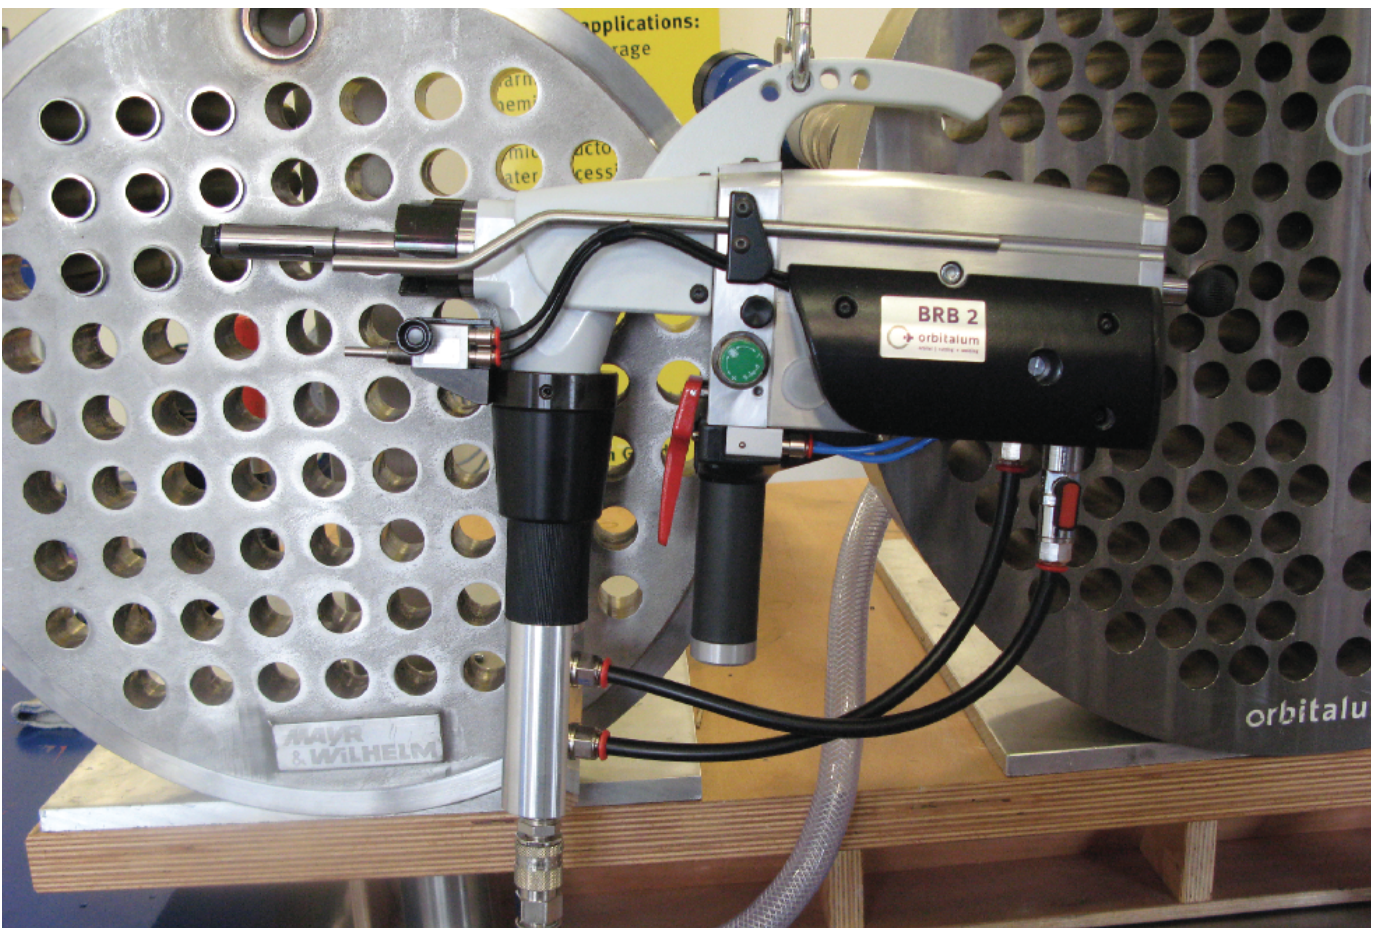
Full autofacing machine tools such as shown here speed weld preparation on the hundreds of tube-to-tube sheet welds used in a typical heat exchanger.
